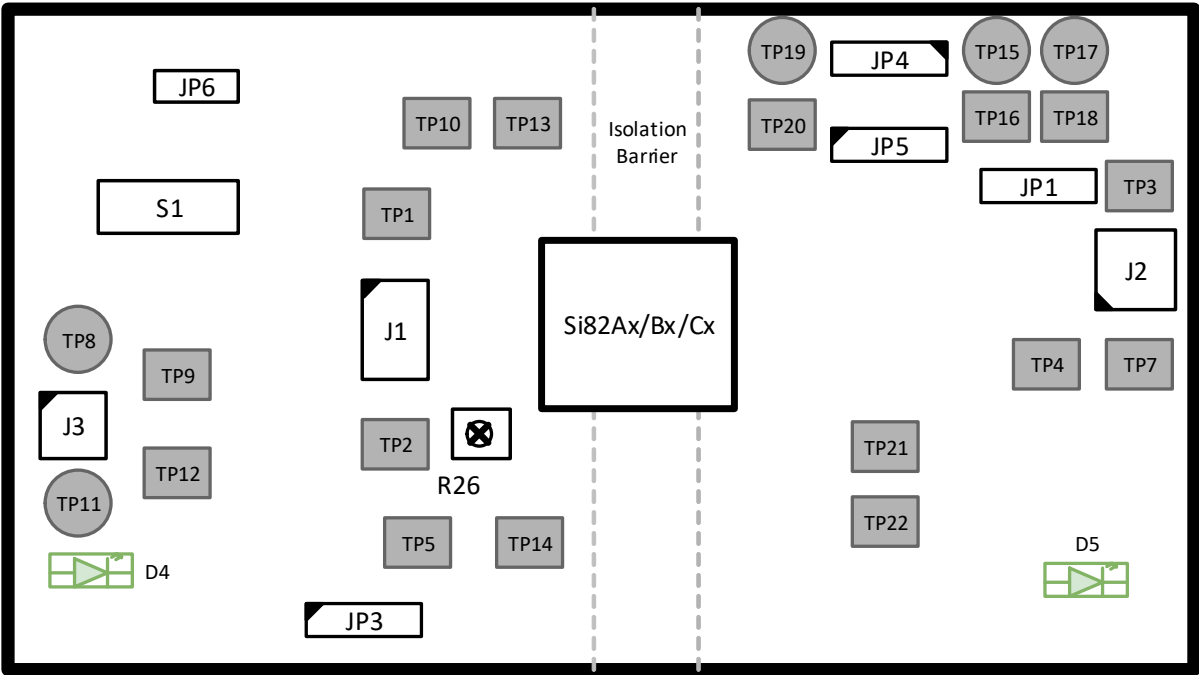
EVB Parts Placement, Pin 1 Positions are Marked
